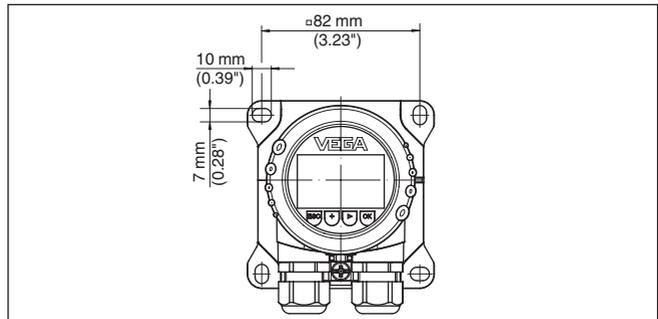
Drilling dimensions for VEGADIS 82 for wall mounting
